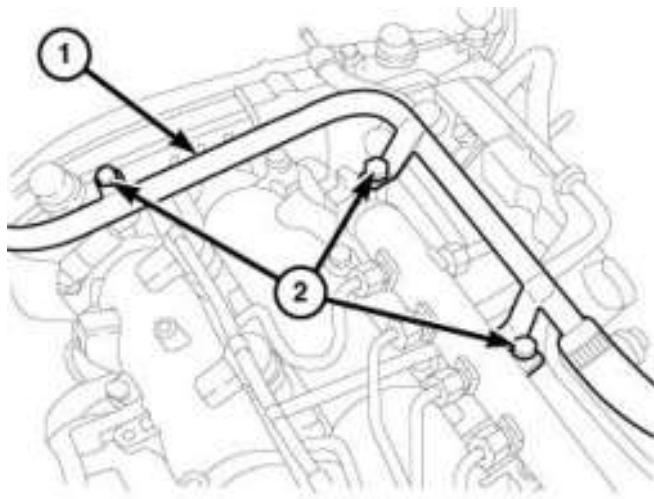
Turbocharger, Oil Feed Line & Banjo Bolts
